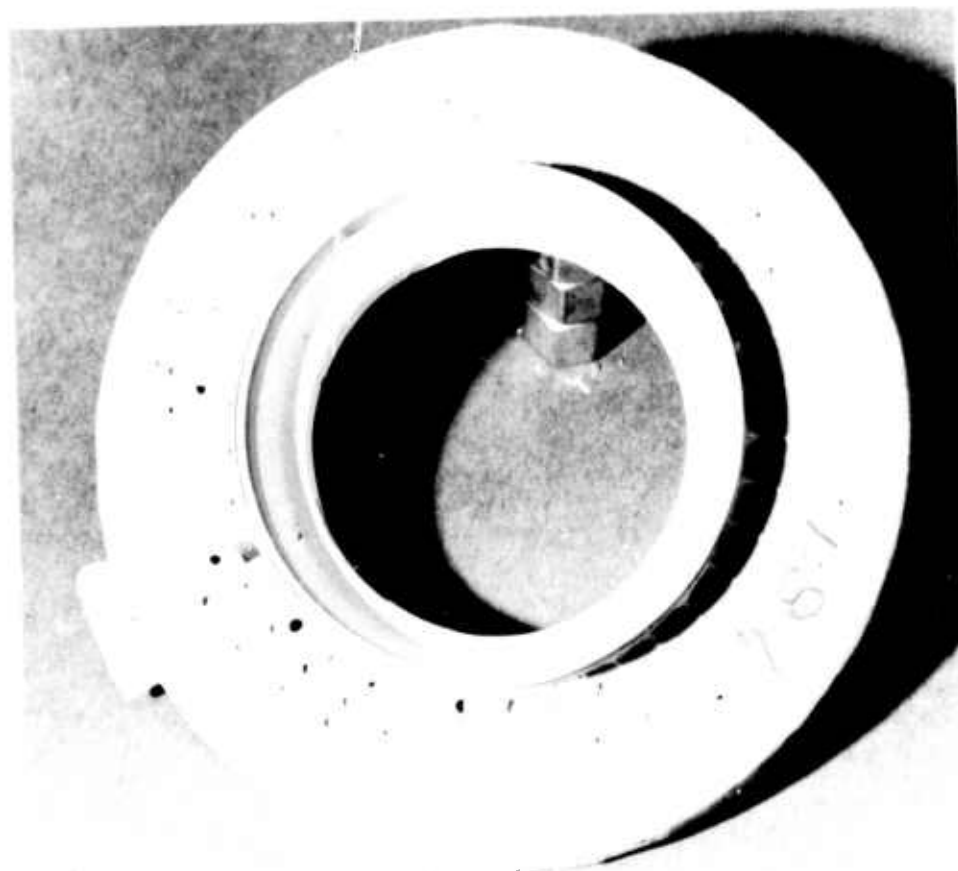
Molded Silicon Nitride Rotor Blade Ring Showing First Blade Fill
